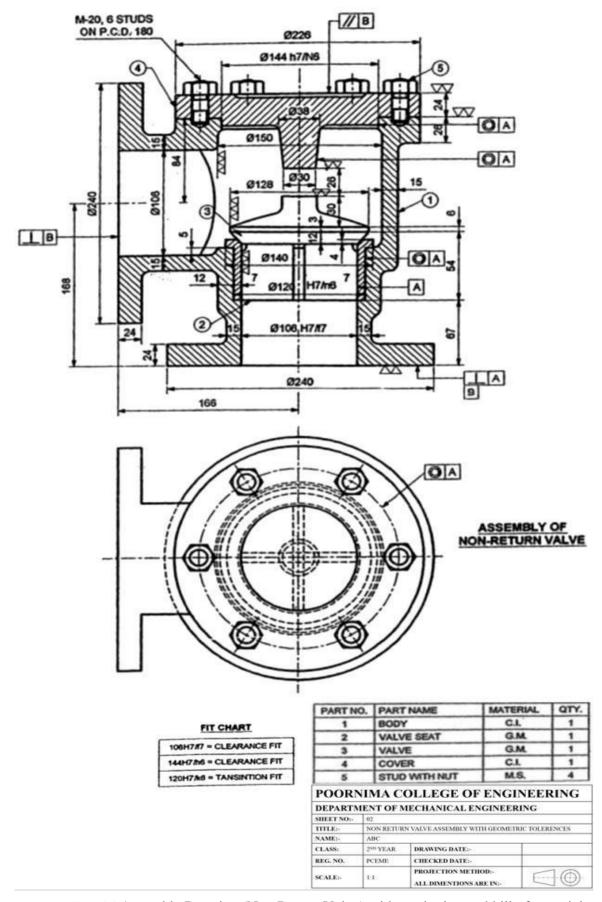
Assembly Drawing (Non Return Valve) with sectioning and bill of materials.
